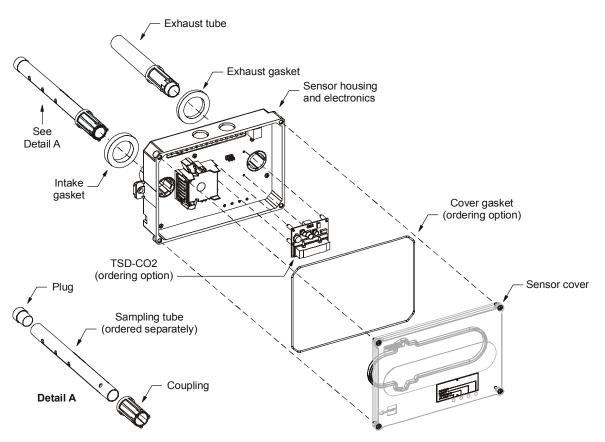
Four-wire smoke sensor exploded view (RJ-45 version)
